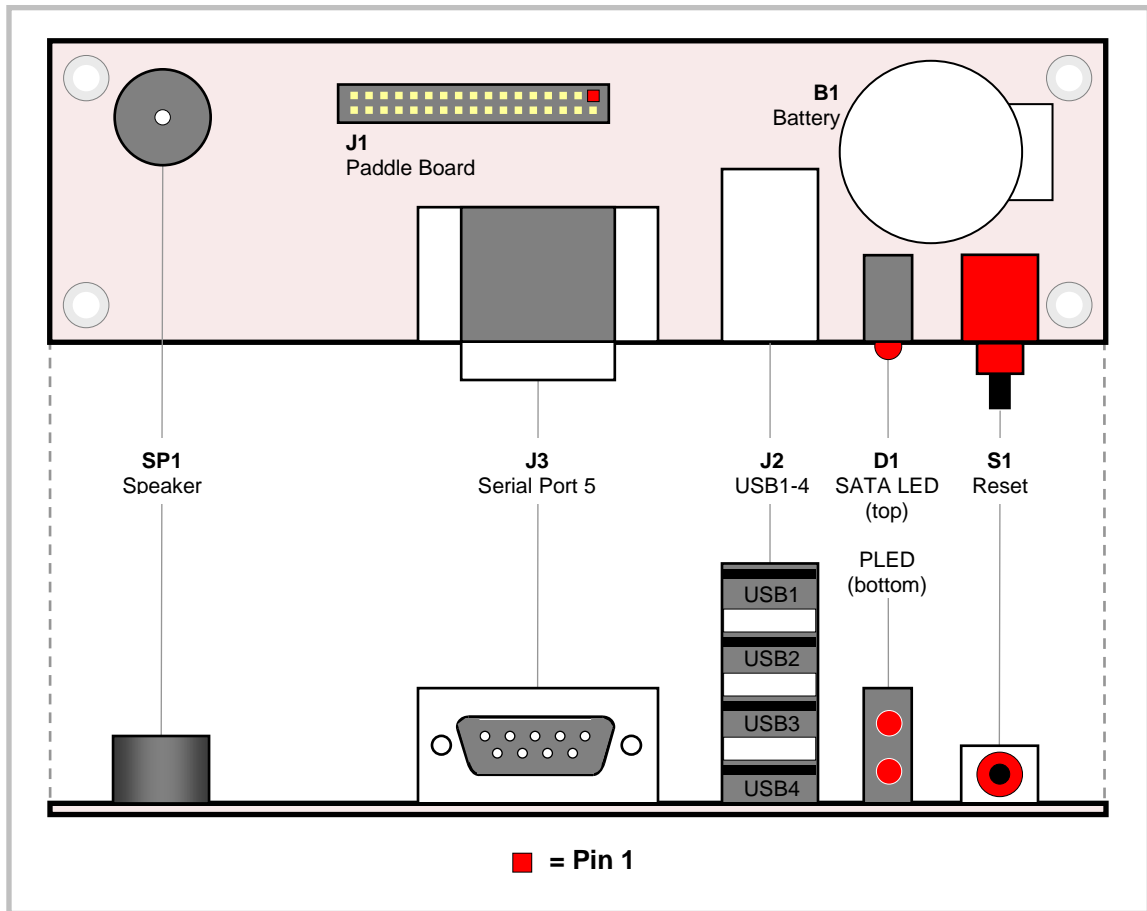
VL-CBR-3406 Connector Locations (Top and Side Views)
